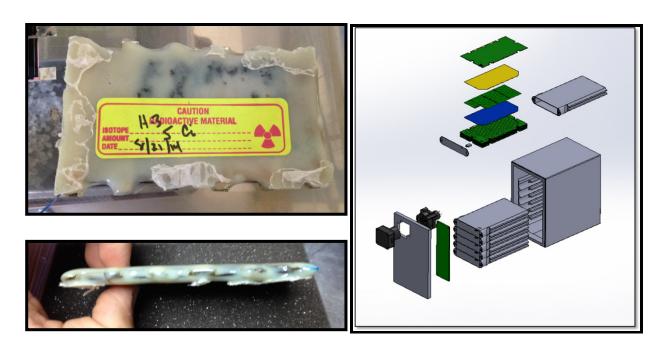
The iBAT GaAs cassette (left) and the 3-D CAD of the iBAT assembly (right)
